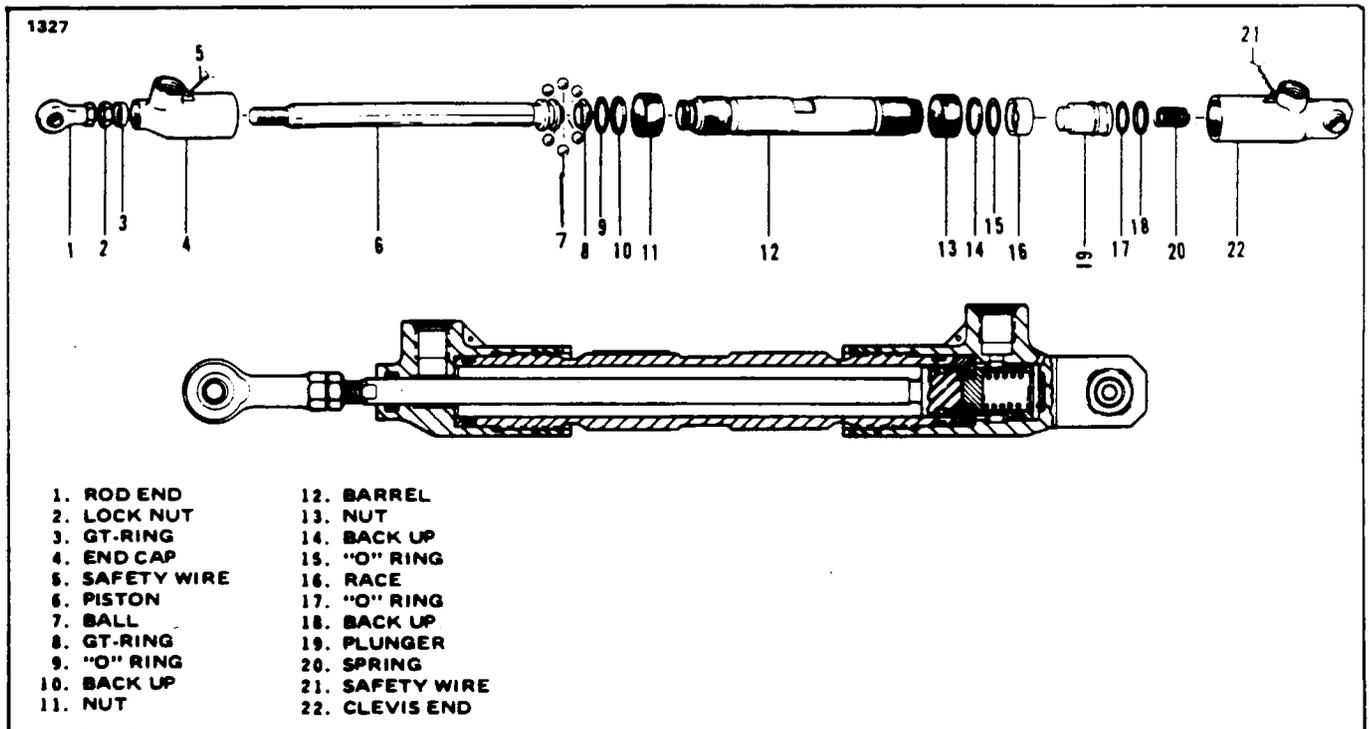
Gear Door Actuating Cylinder (Wiebel WTC 2114-1)
